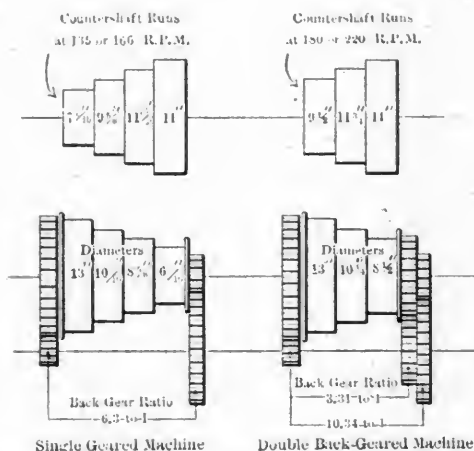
BACK-GEAR RATIOS FOR SINGLE AND DOUBLE BACK-GEARED MACHINES.
